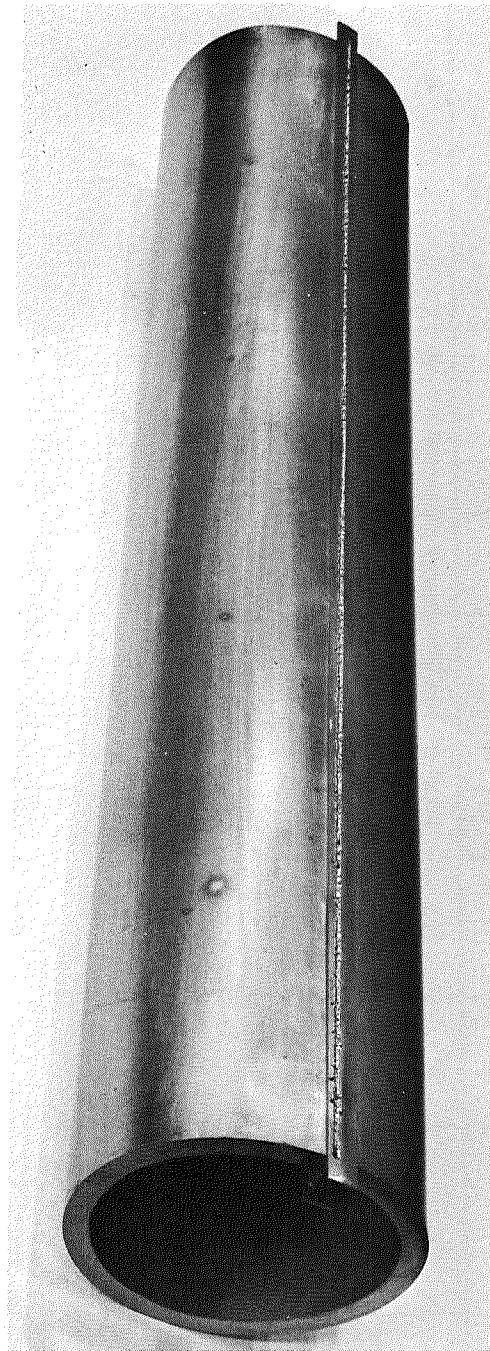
Electron Beam Welded T-111 Tube Shell B
